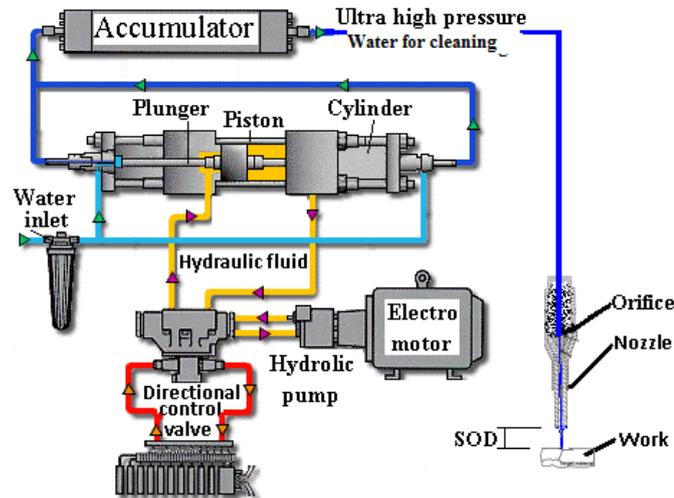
Schematic illustration of a high pressure waterjet machining system
